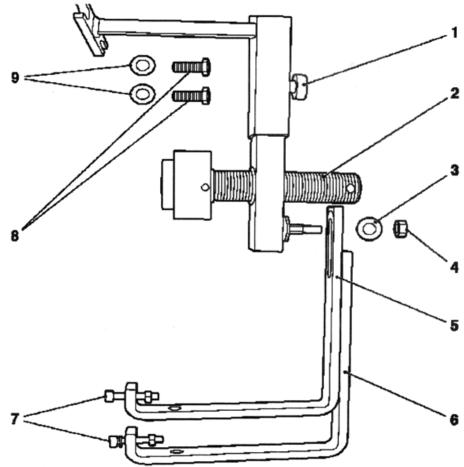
Gadgets for withdrawal and Installation stubborn Plates and slave disc clutch:
